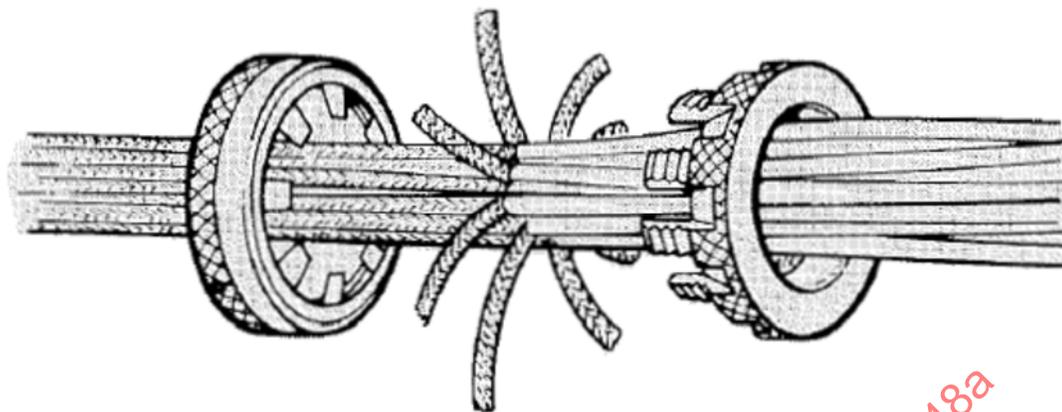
STEP 2 OF ASSEMBLY INSTRUCTIONS
